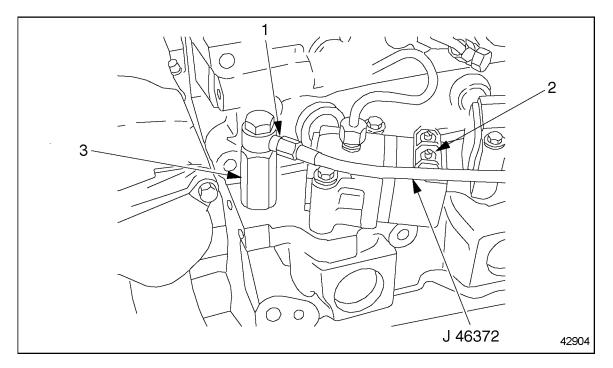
Fuel Adaptor Parts Kit J-46377
